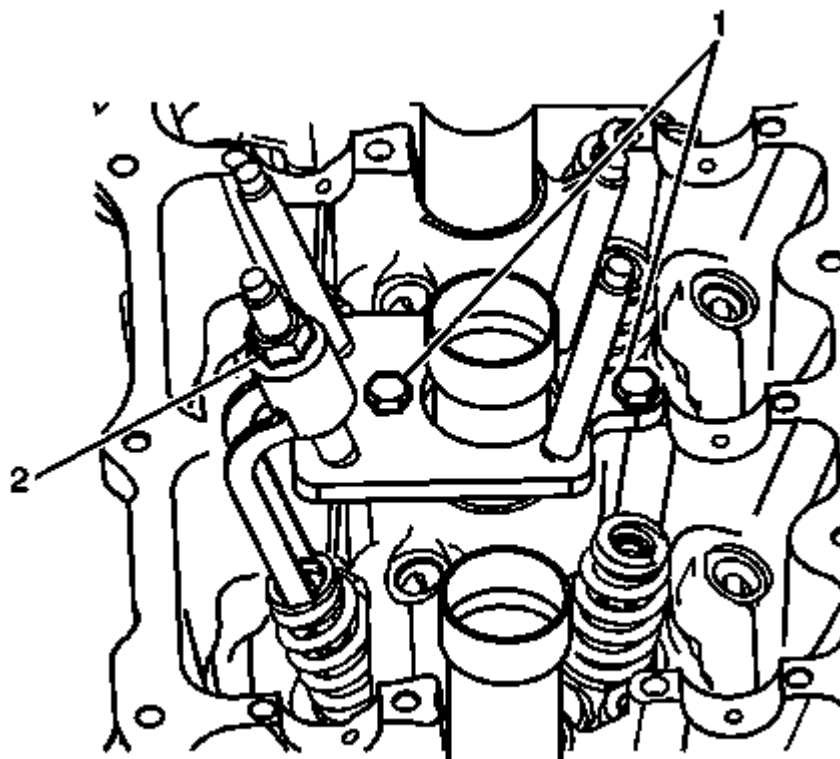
View Of EN 46110 Valve Spring Compressor Nut
